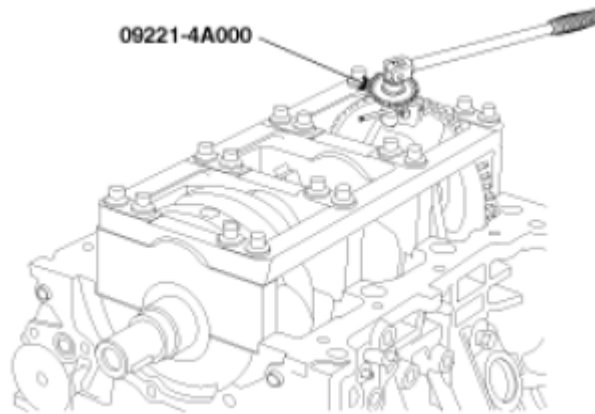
Installing Connecting Rod Bearing Cap Bolts
